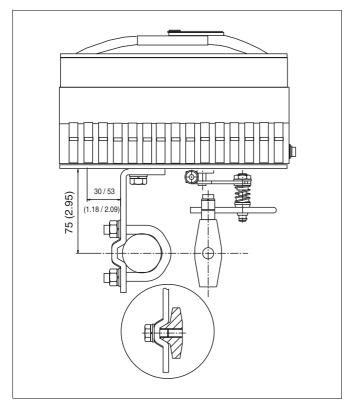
Mounting to linear actuators to DIN/IEC 534
